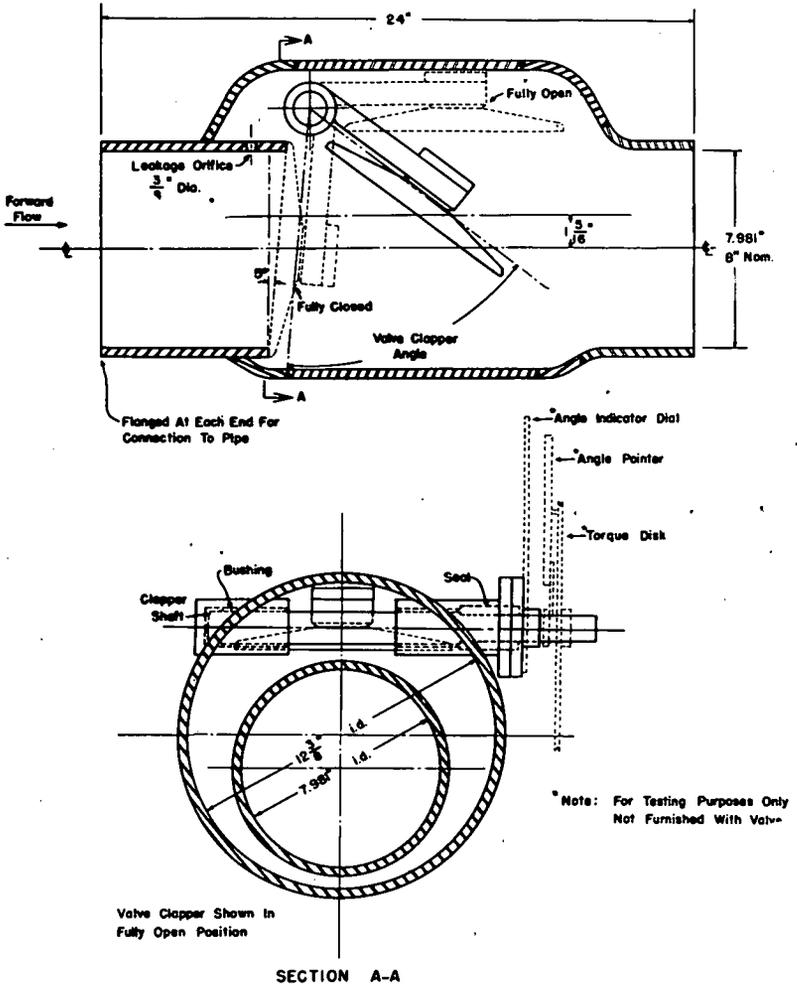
DETAILS OF SWING CHECK VALVE "A".
